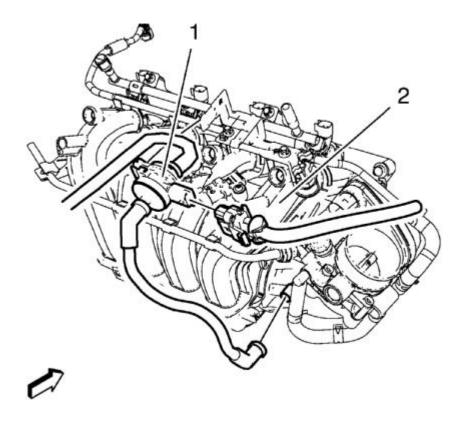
Evaporative Emission Canister Purge Solenoid Valve, Rubber Mounting And Intake Manifold
